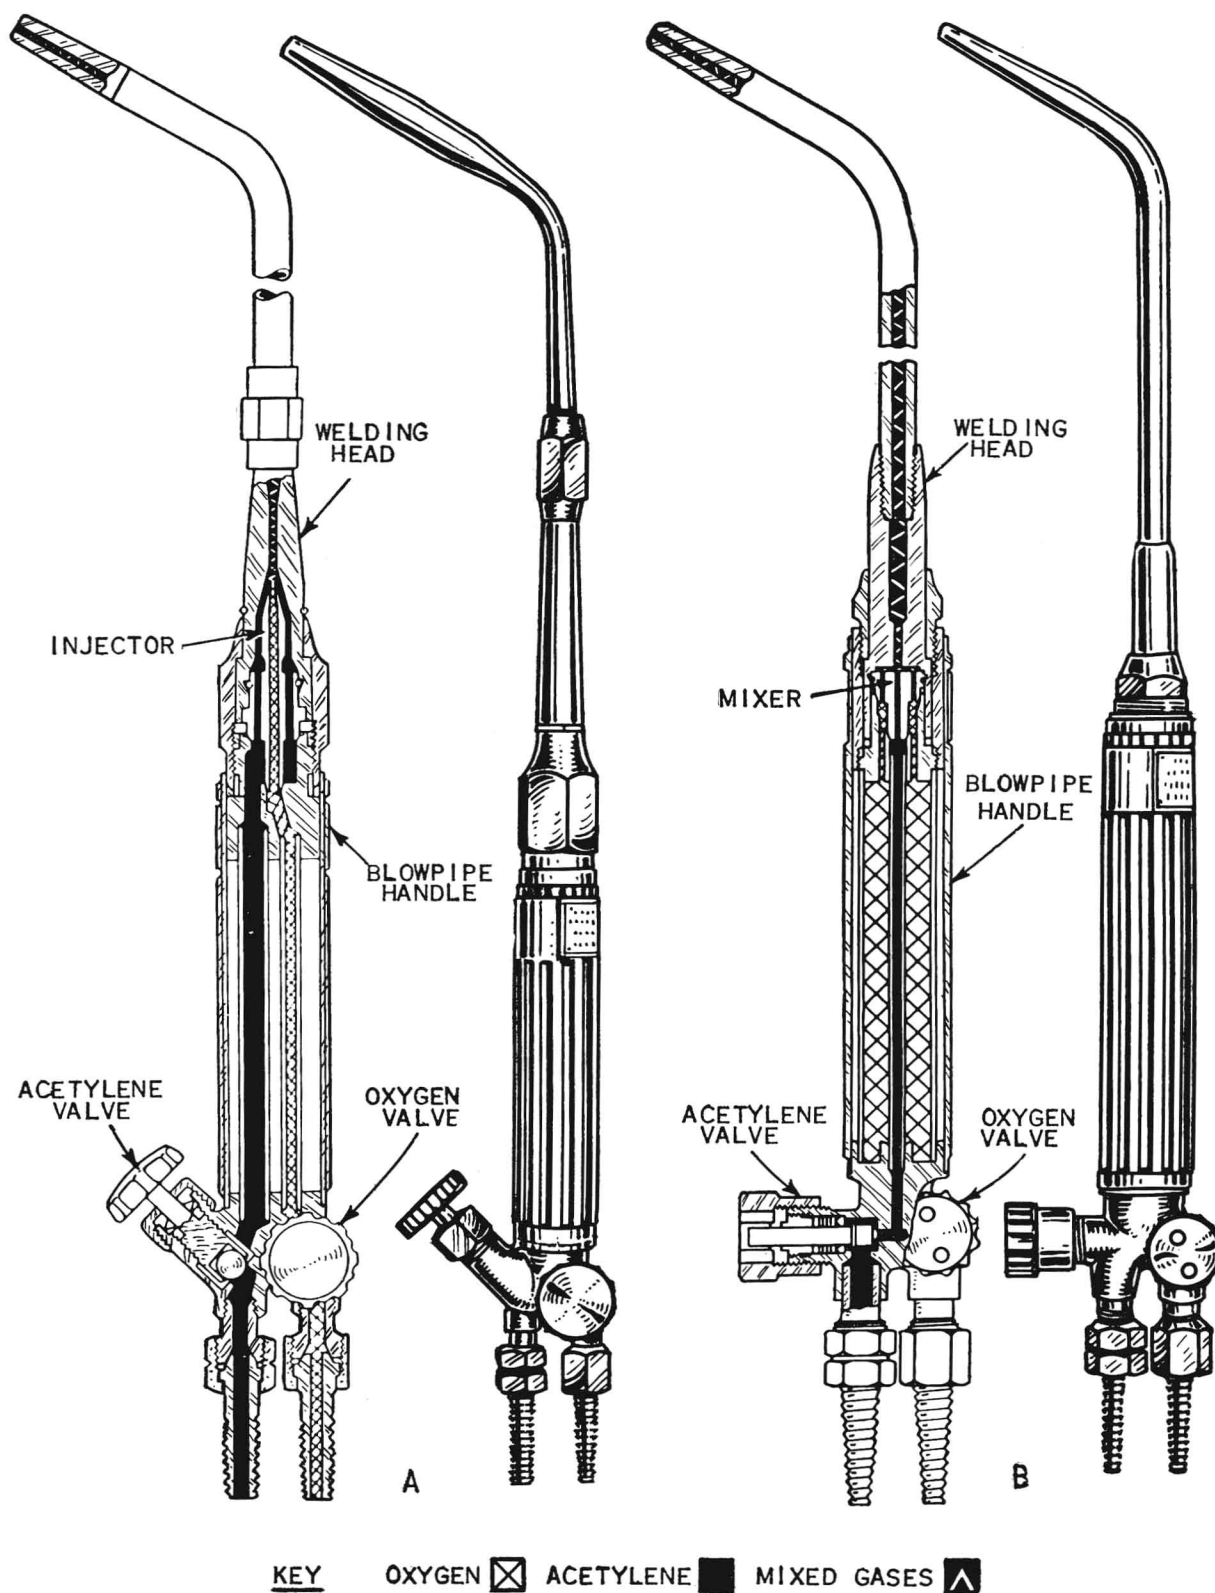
(A) A typical injector-type welding blowpipe. (B) A typical medium-pressure-type welding blowpipe.
